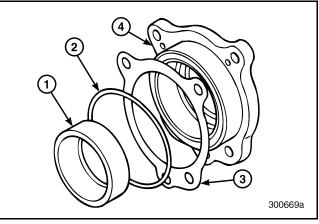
Exploded View of Rear Countershaft Bearing Cover
